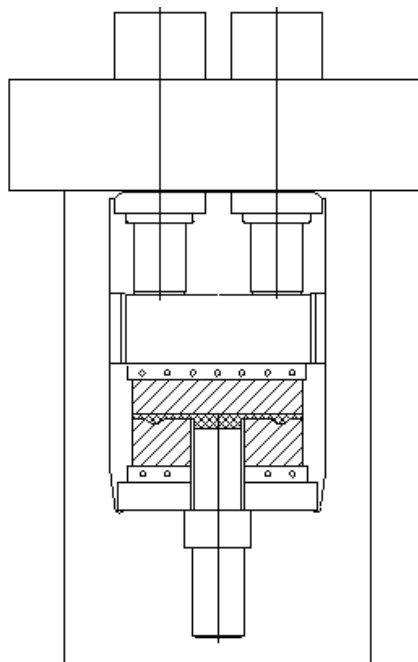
Press for transfer moulding shown with separate cylinder and with moulding material fed into the moulding cavity
